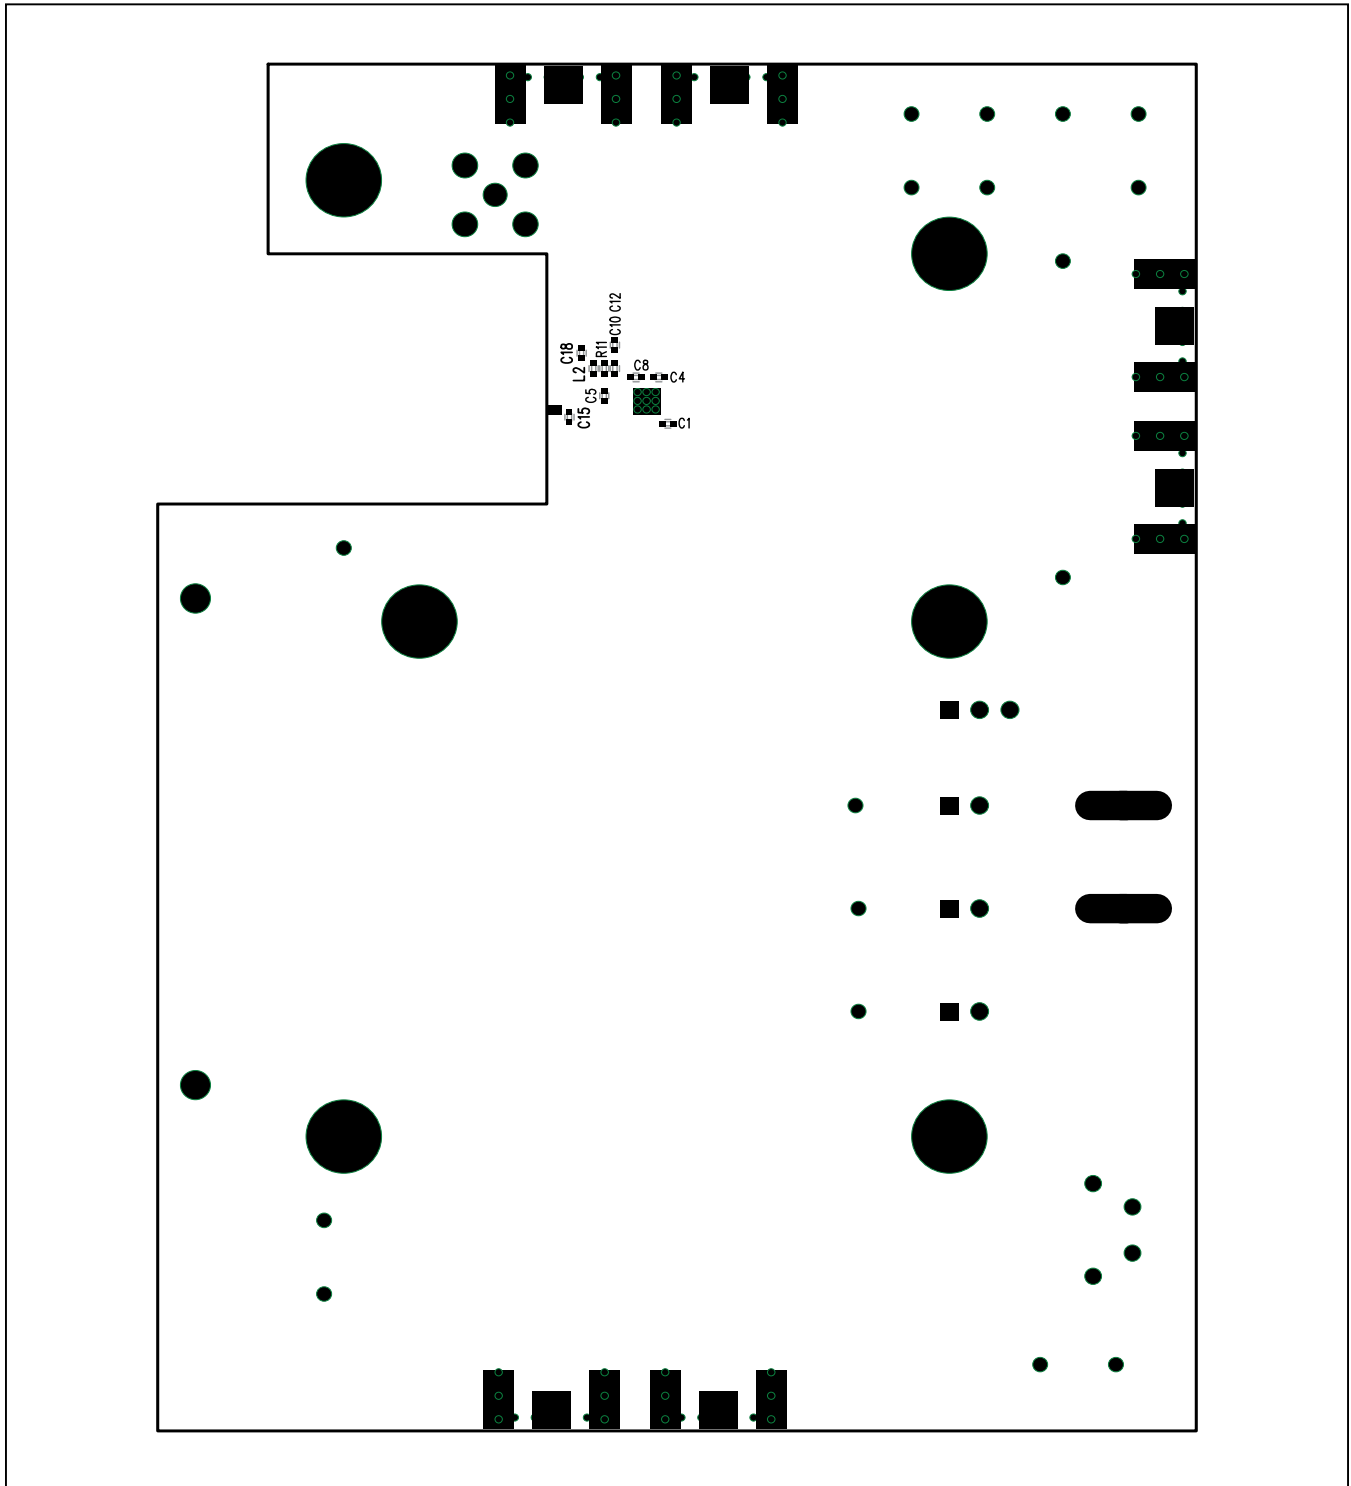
MAX3711 EV Kit Component Placement Guide—Solder Side
